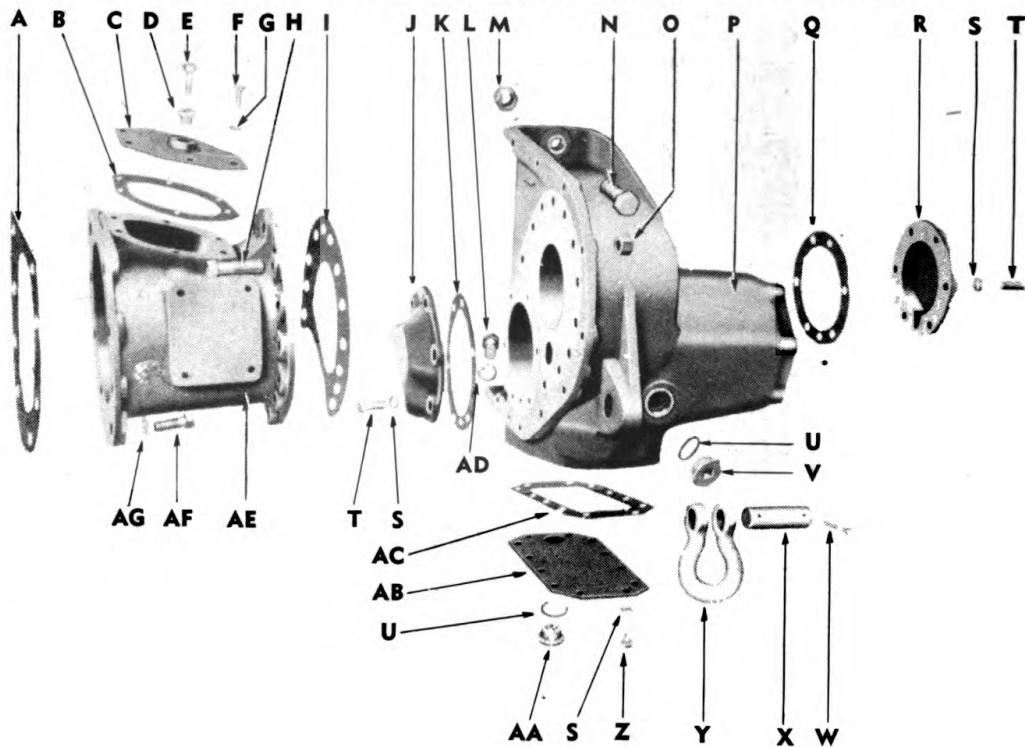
Final Drive Sprocket Shaft Assembly Disassembled
